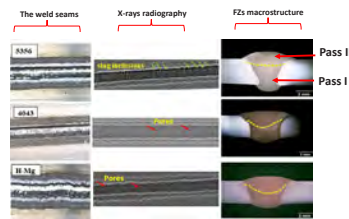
weld seams, X-rays radiography, and FZs macrostructure.
